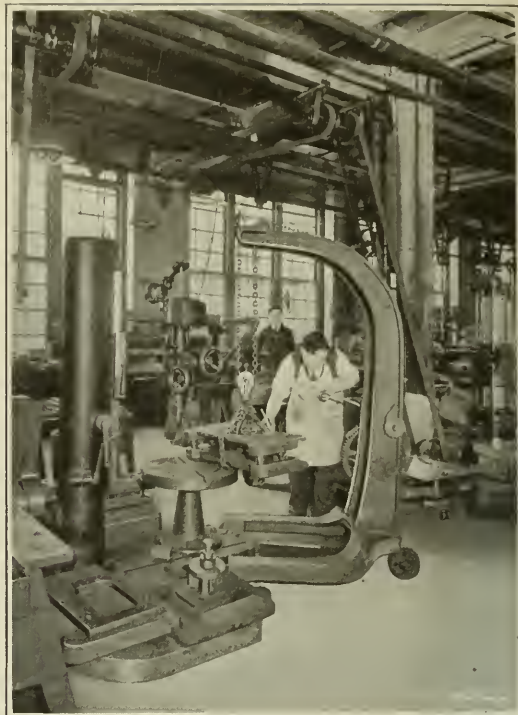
In setting up heavy pieces on machine tools, it may be difficult to handle work on a traveling crane, due to the inability of that kind of equipment to reach the desired point. This illustration shows a view in the Cadillac Motor Car Co.'s factory, where a portable crane built by the Franklin Machine Works, Franklin, Pa., is engaged in setting up work on the table of a radial drilling machine
